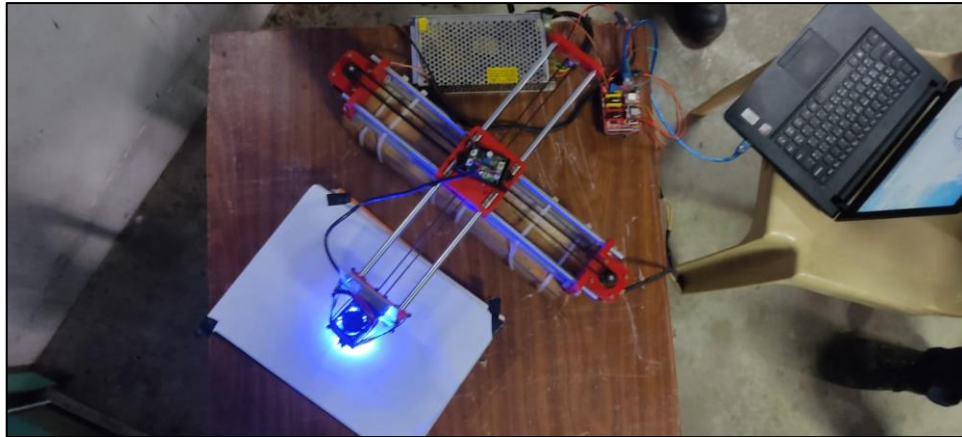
Mini Laser wood Engraver and paper cutting machine are in action
